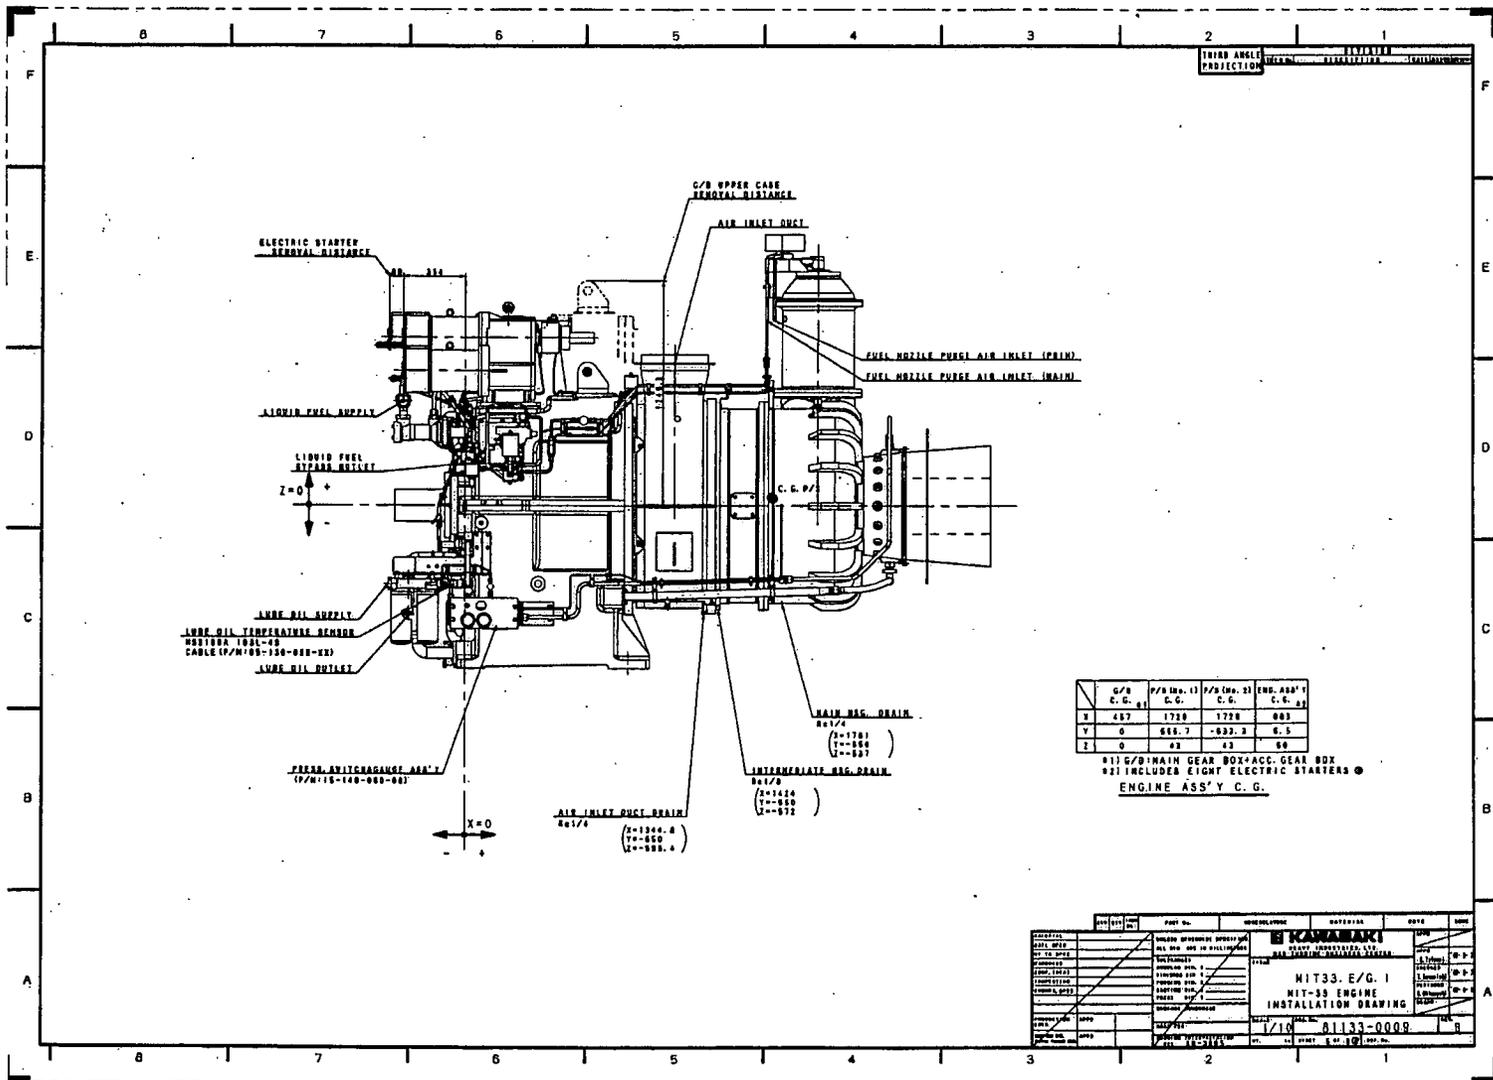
Installation Drawing of Gas Turbine Assembly (sheet 5)
